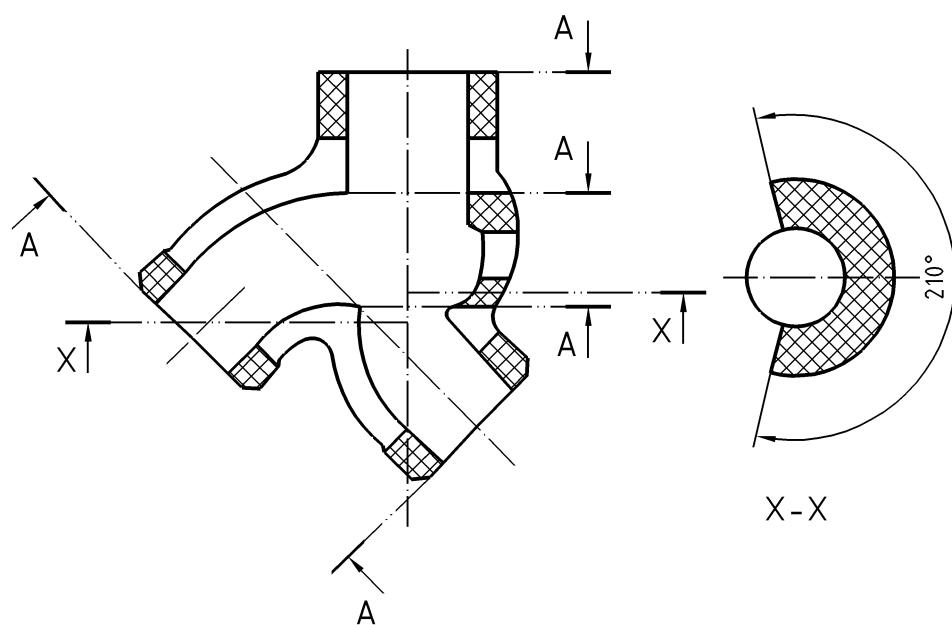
Typical casting section showing required radiographic examination of elbow down valve body (pressure seal bonnet)
